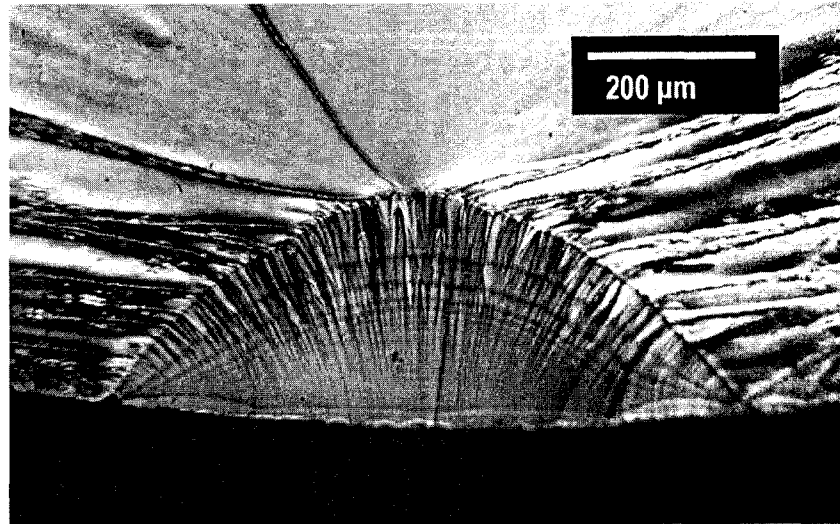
Fracture surface of the fatigue crack under tension-tension cyclic loading condition.
